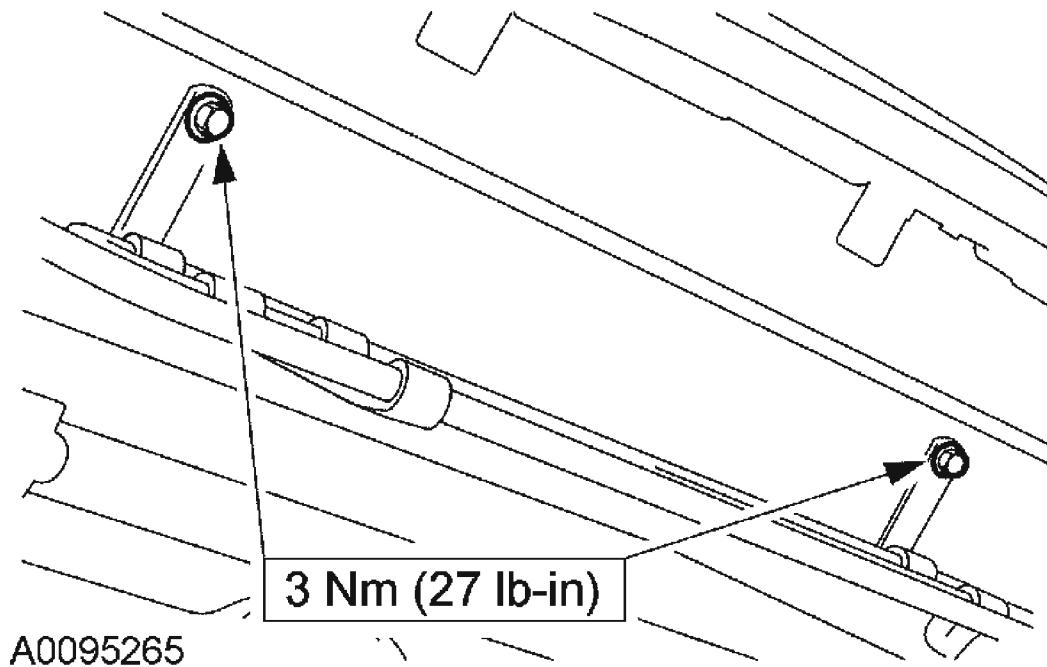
Removing Power Steering Fluid Cooler Bolts
